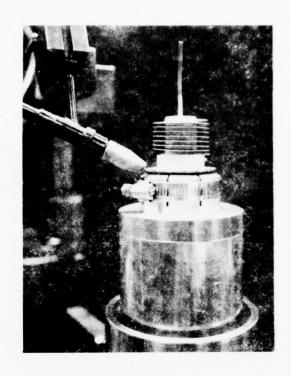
Heliarc Welding Fixture: A device clamped into its welding fixture heat sink is shown. During welding, an arc extends from the torch on the left to the flange. The second weld is made by turning the device over and inserting it into the bottom of the heat sink fixture.
